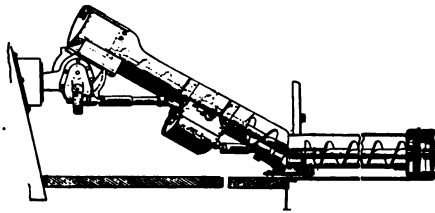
Outline of the Crosby Stoker and Conveyor.
